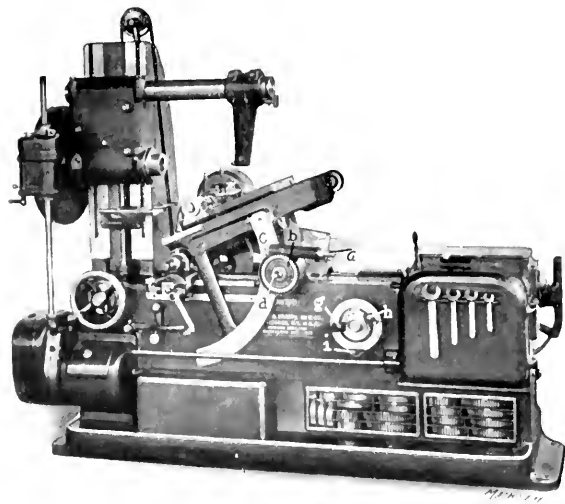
Front View of Brown & Sharpe No. 13-H Gear Cutting Machine
